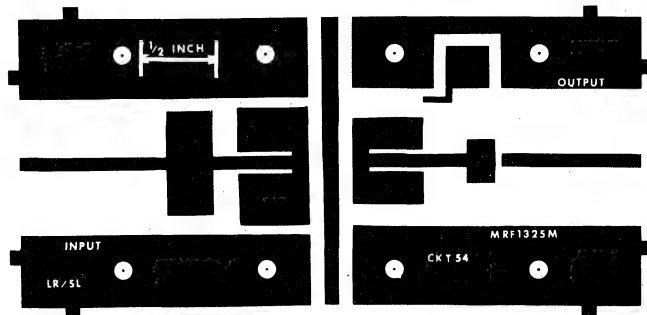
PRINTED CIRCUIT BOARD LAYOUT — 1090 MHz TEST CIRCUIT
